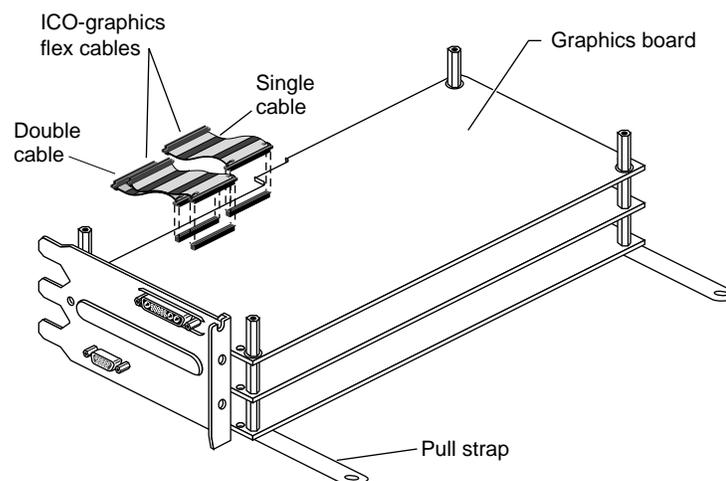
Attaching the ICO-Graphics Cables to the Graphics Board
